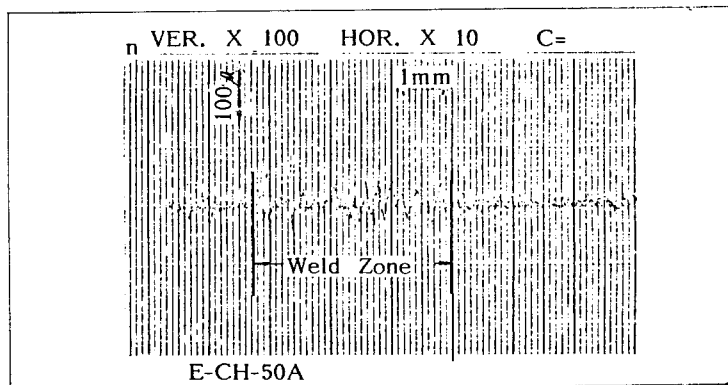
Recording of surface roughness. (vertical magnification : 100X, Horizontal magnification : 10X, Welding electrode ; E4301, Feed ; 0.31mm/rev., Depth of cut ; 1.0mm, Cutting Speed ; 78mm/min.)
